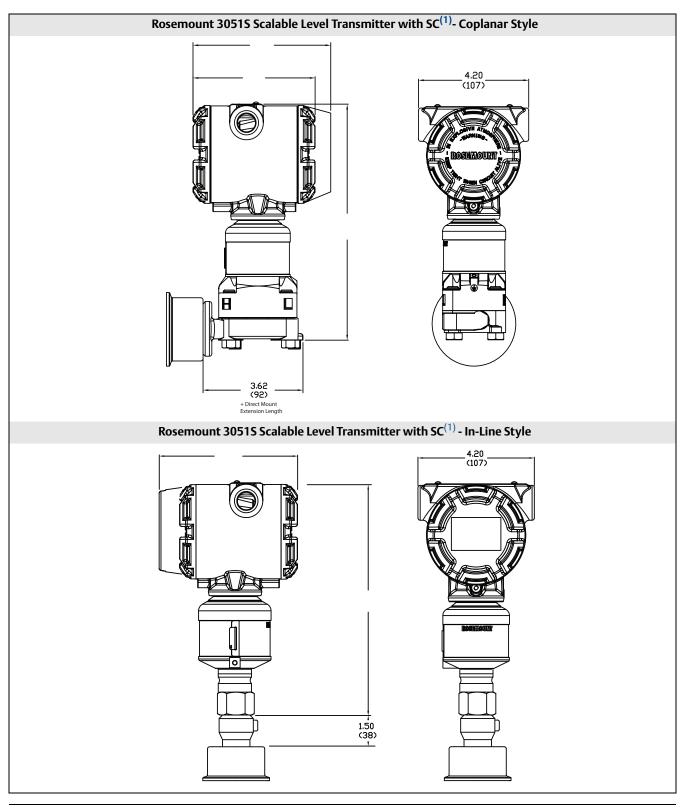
Rosemount 3051S Scalable Level Transmitter with SC Seal (Measurement in inches (millimeters))
